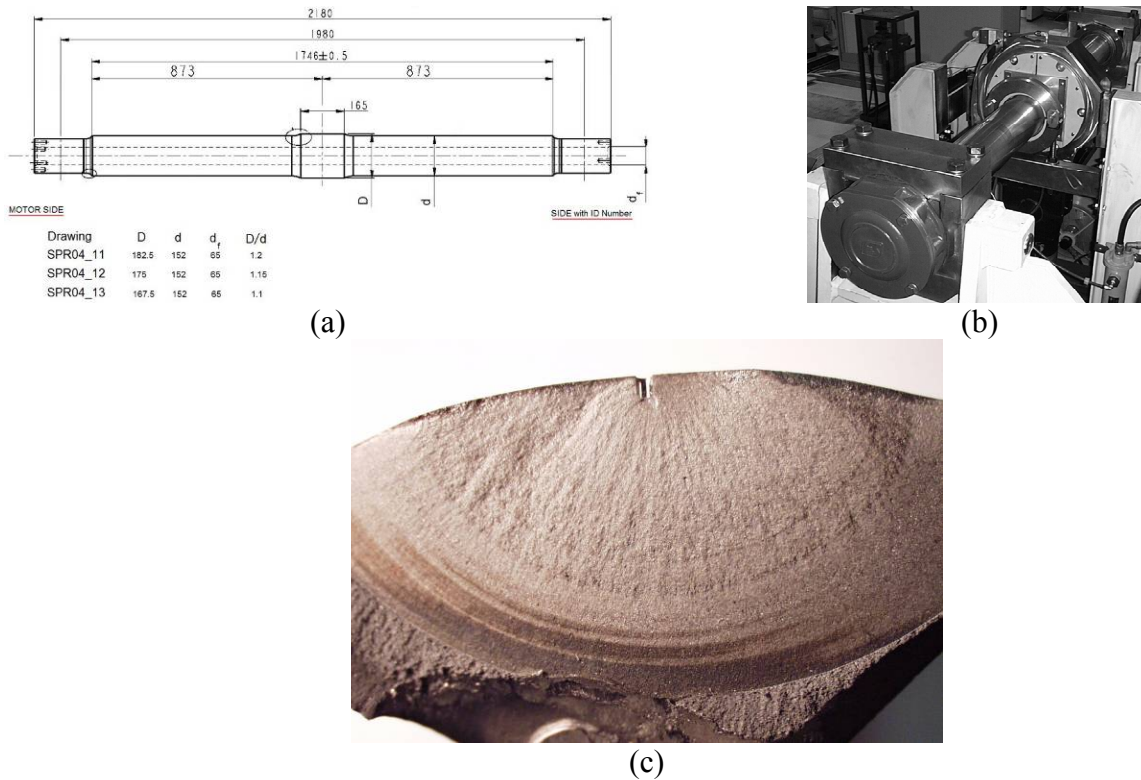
UT measurements of natural cracks in hollow axles: a) drawing of the axles; b) dedicated test bench; c) typical fatigue crack.
